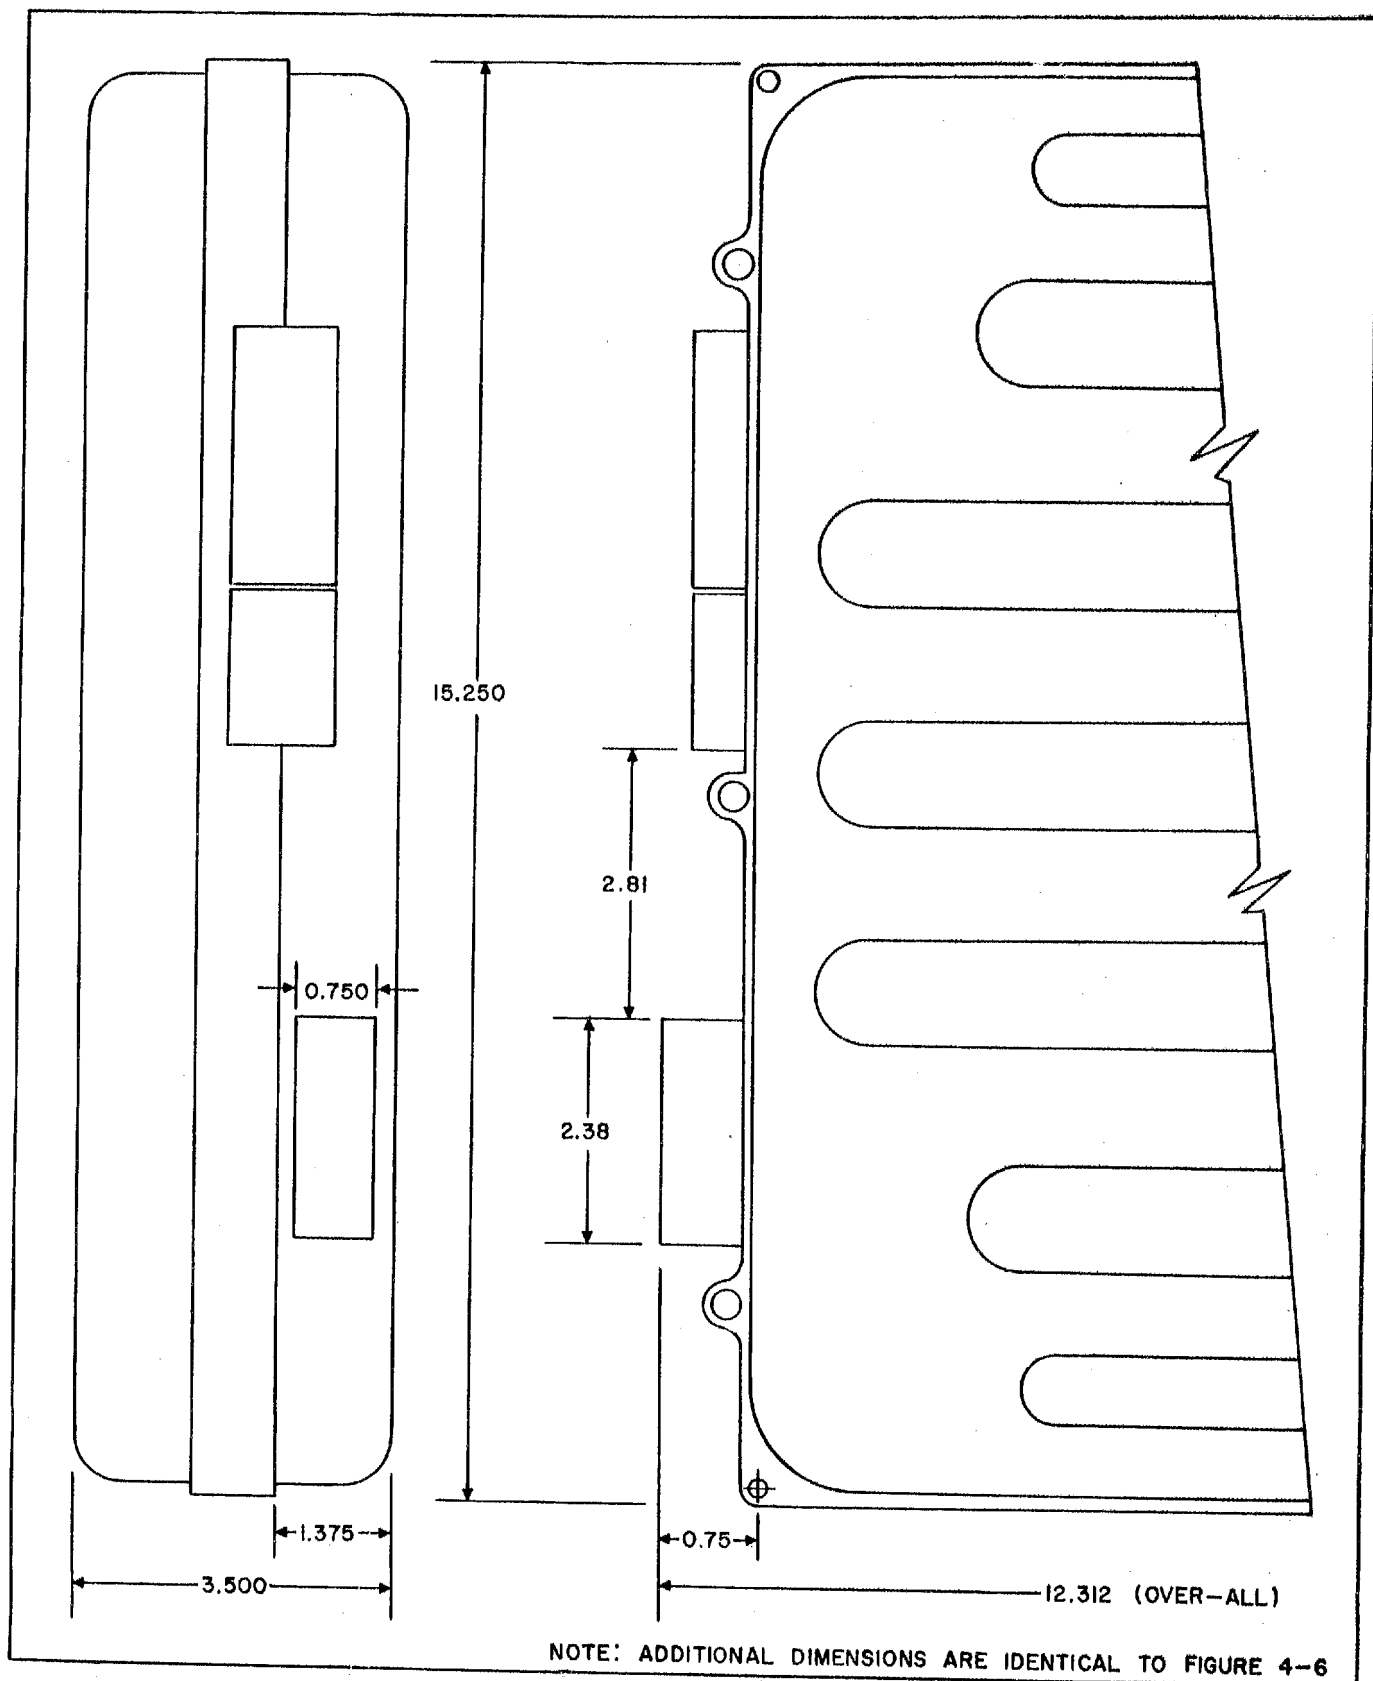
Information Recorder with Heater-Equipped Metal Top Cover, Installation Dimensions
